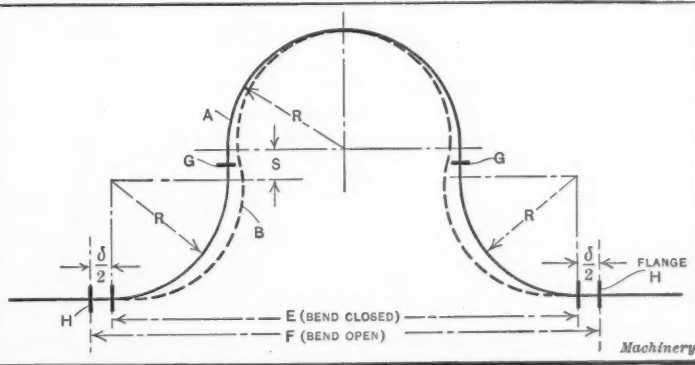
Expansion Bend that reduces Bending Stress in Main
